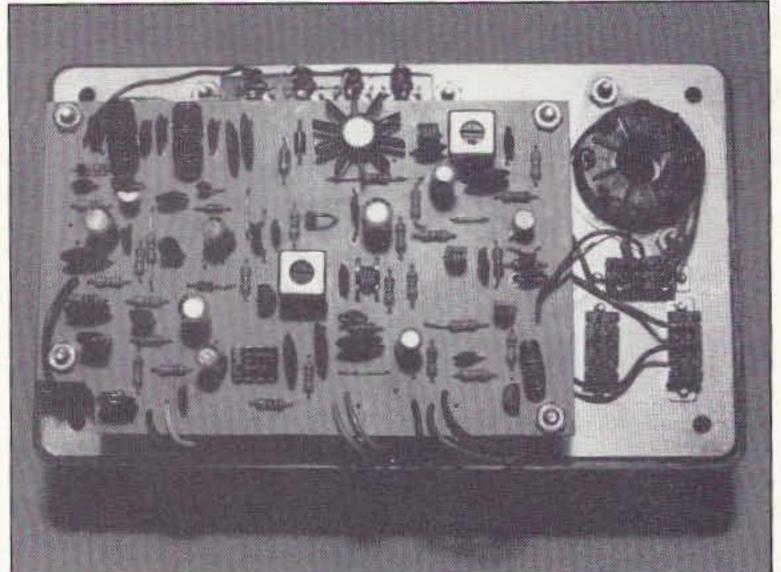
Photo B. Inside view of the SP-1. The PC board, switches and sockets are mounted directly the bottom side of the project box metal cover.
